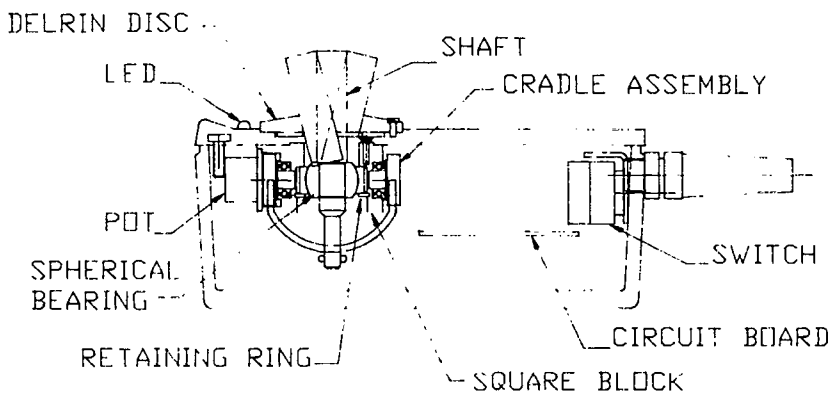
SECTIONAL VIEW OF JOYSTICK ASSEMBLY
